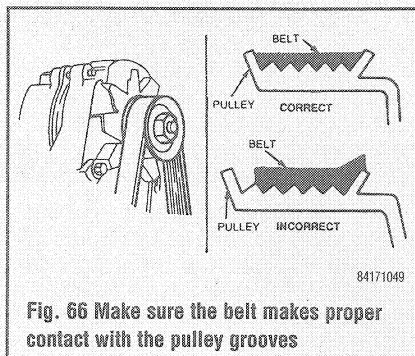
Make sure the belt makes proper contact with the pulley grooves
